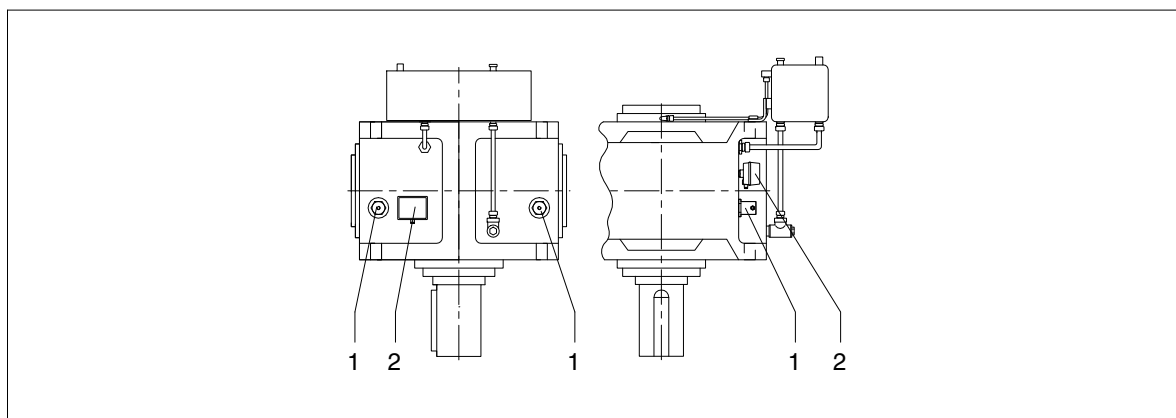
Heating on gear unit with oil-equalising tank of types H..V and B..V
